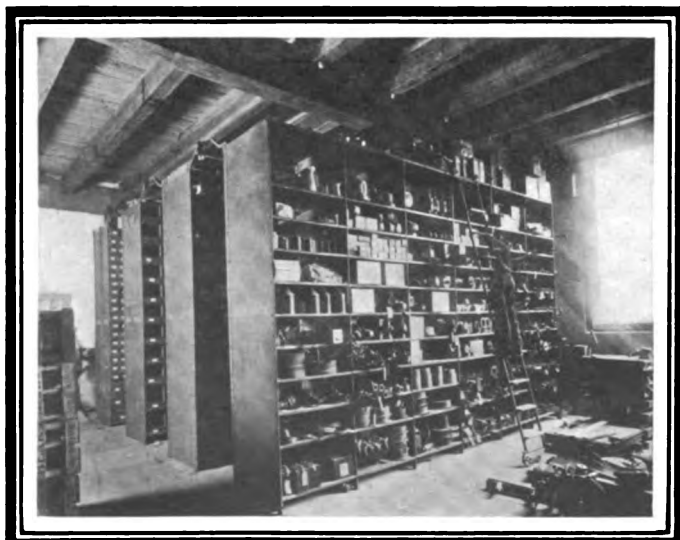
View of sheet-metal shelving in stock room of Alco service building, Long Island City. This room will hold \$80,000 worth of parts
